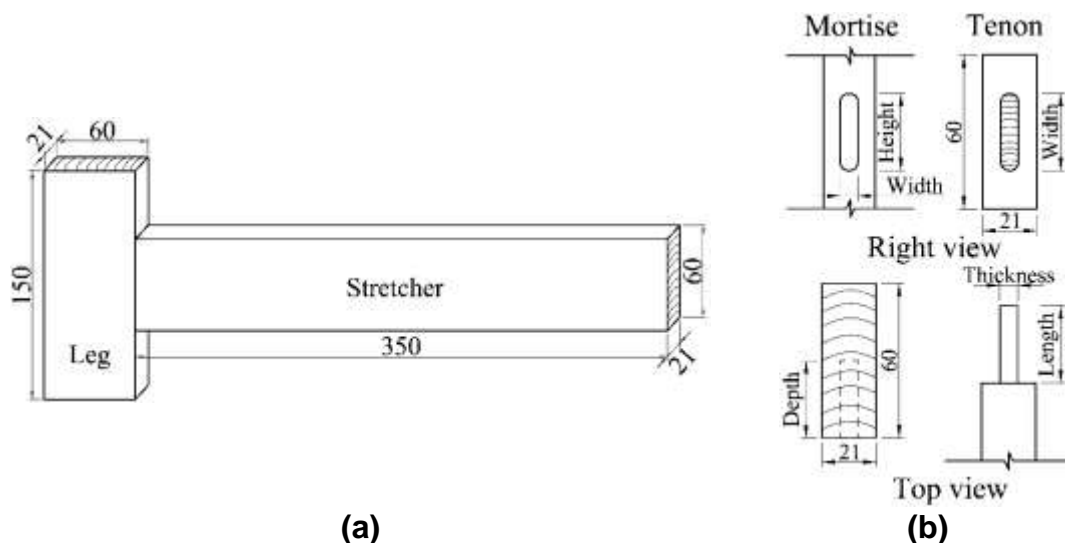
Dimensions of specimen: (a) T-shaped sample; (b) mortise-and-tenon joint
